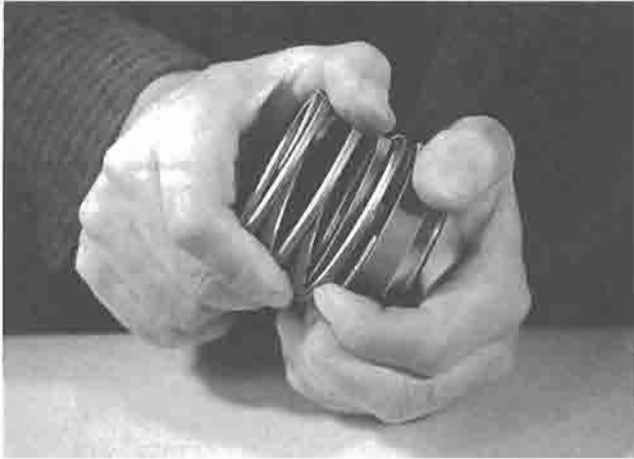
ASSEMBLING SPRING AND SEAL RING
